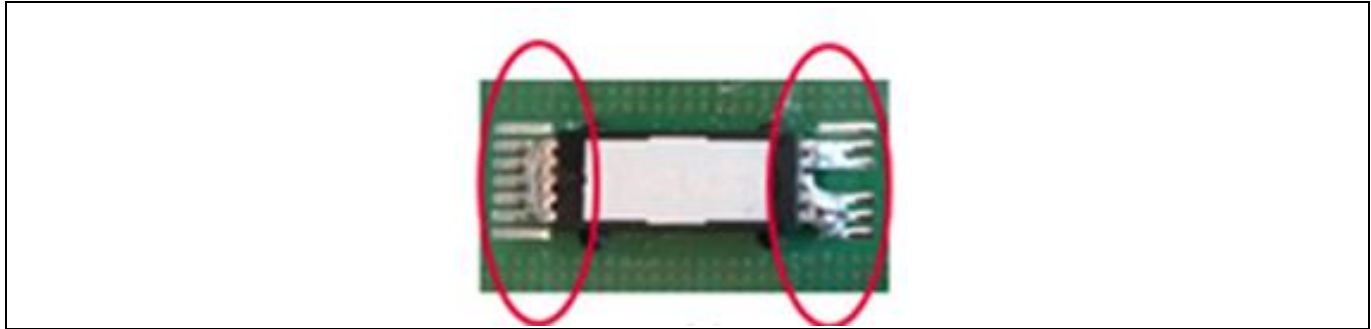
DDPAK experiment with wave soldering – short on pins (not allowed)
